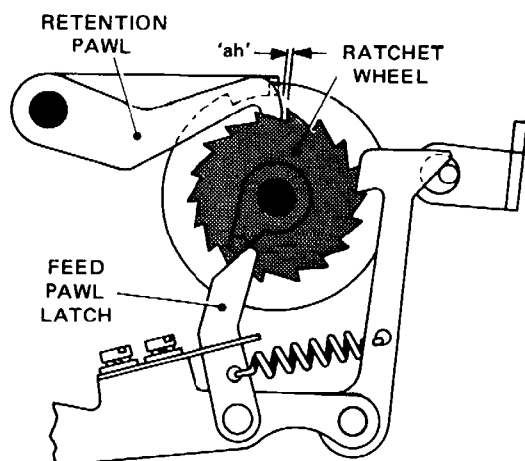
FEED PAWL LATCH MECHANISM (REAR VIEW)
